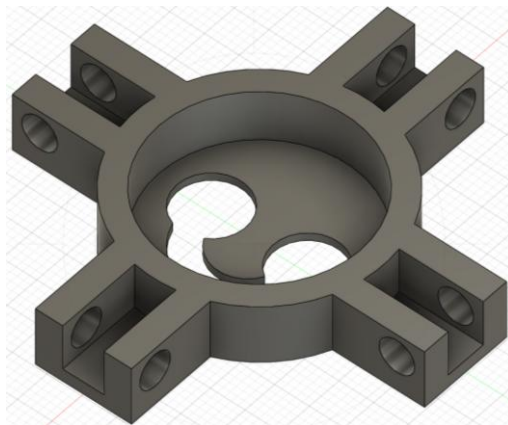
PVD QCM mask single part top part design. (hole radius 1.3mm, wall thickness 2mm)
